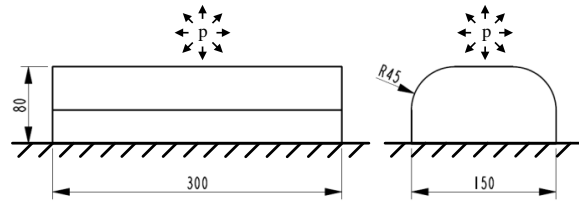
Ambient pressure on rapid tooling mould (test body with nominal dimensions in mm).
